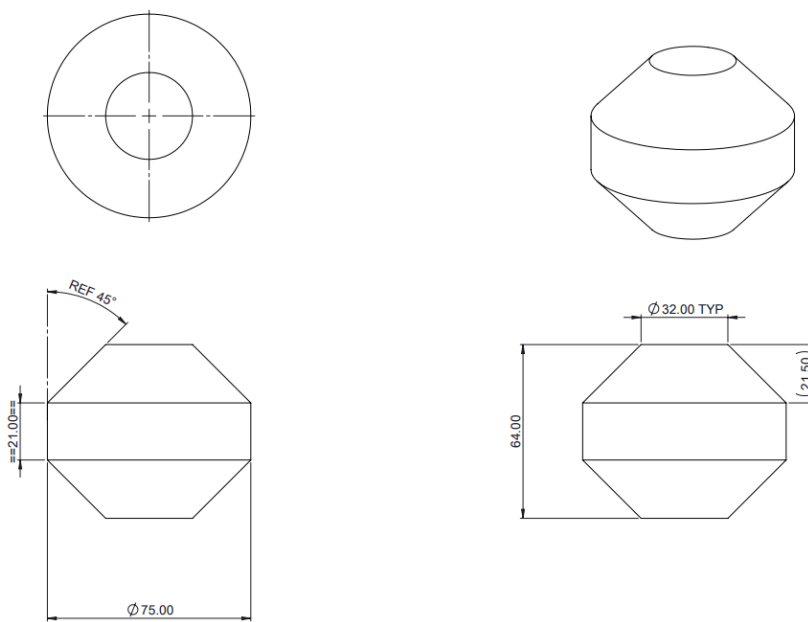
Drawing of DTC's showing the key dimensions in mm.
